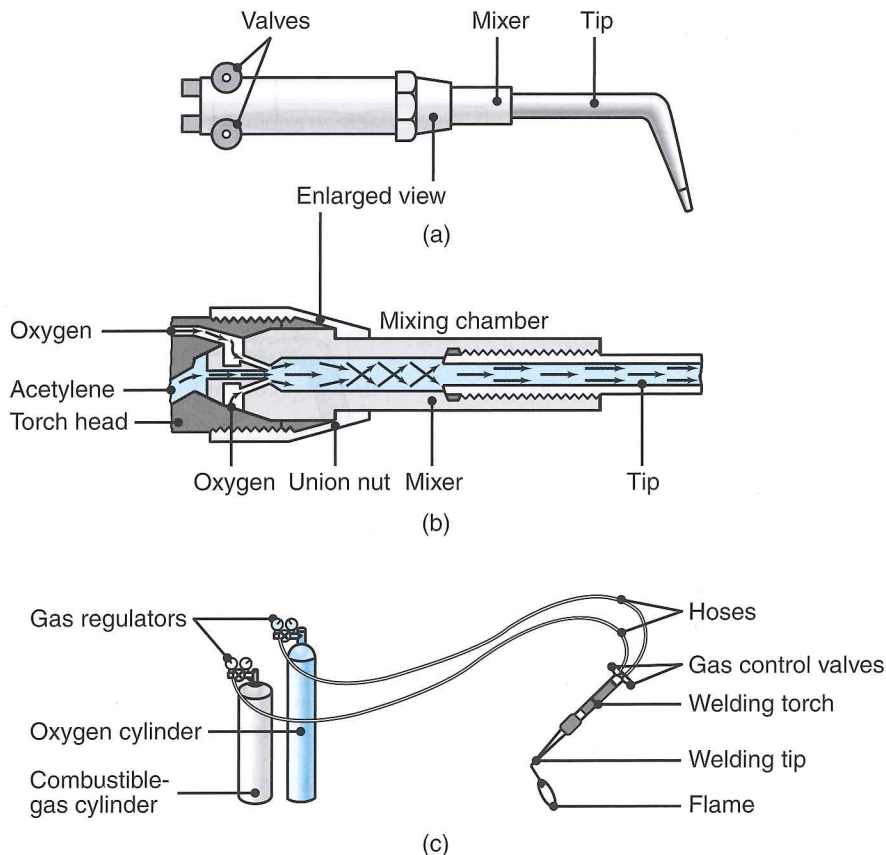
(a) General view of, and (b) cross-section of, a torch used in oxyacetylene welding. The acetylene valve is opened first; the gas is lit with a spark lighter or a pilot light. Then the oxygen valve is opened and the flame adjusted. (c) Basic equipment used in oxyfuel-gas welding. To ensure correct connections, all threads on acetylene fittings are left handed, whereas those for oxygen are right handed. Oxygen regulators usually are painted green and acetylene regulators red.
